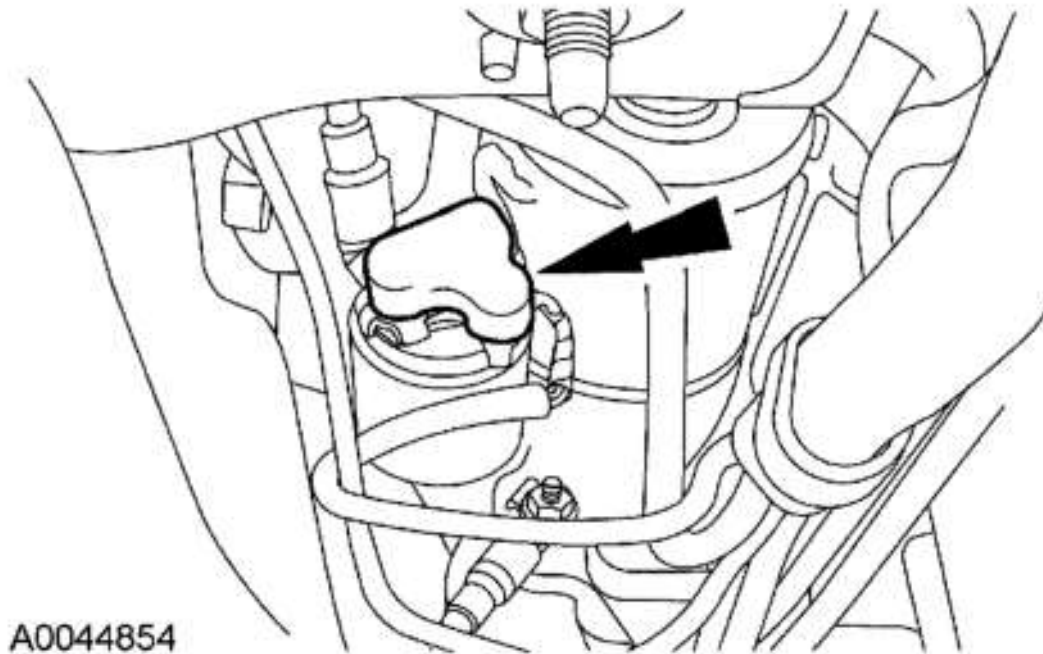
Removing Plastic Starter Motor Electrical Connector Cap
